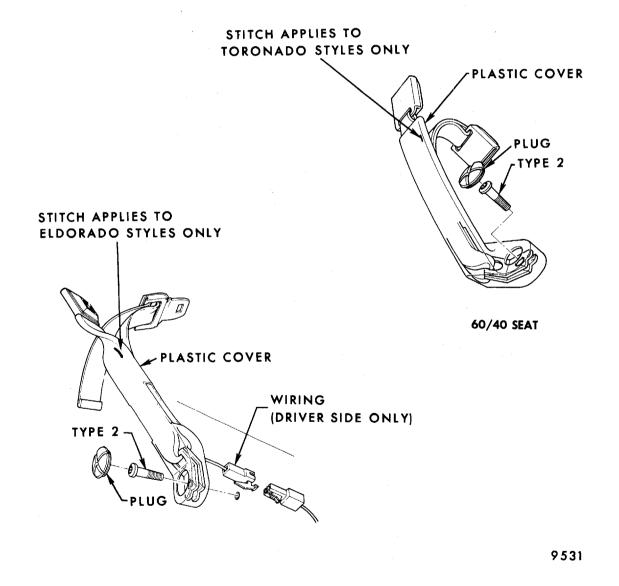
Front Seat Inner Lap Belts - B,C and E Styles, Less Cadillac C Styles
